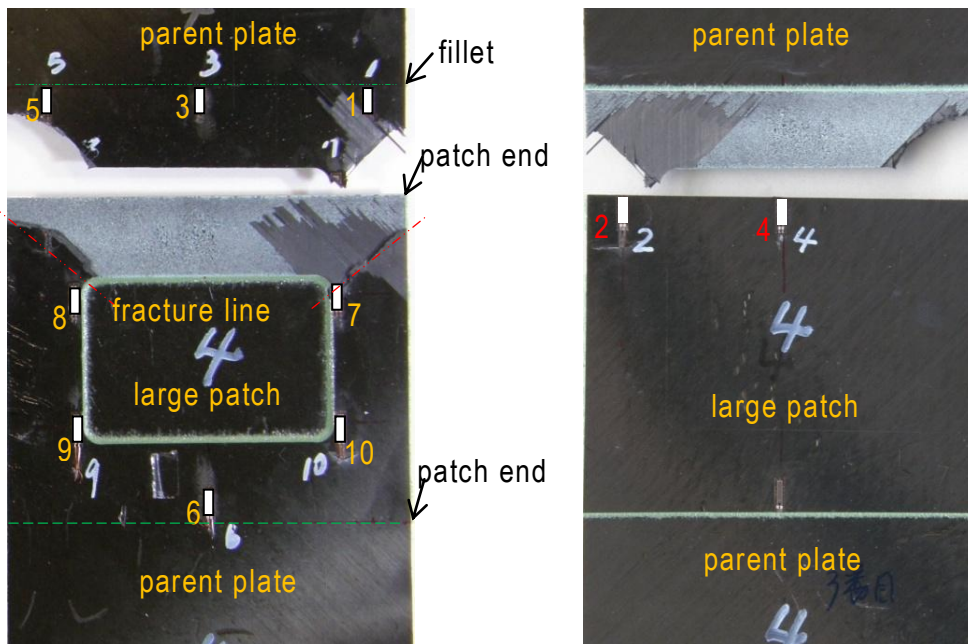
Fractured specimen and positions of strain gauge of CFRP large-PP-3
